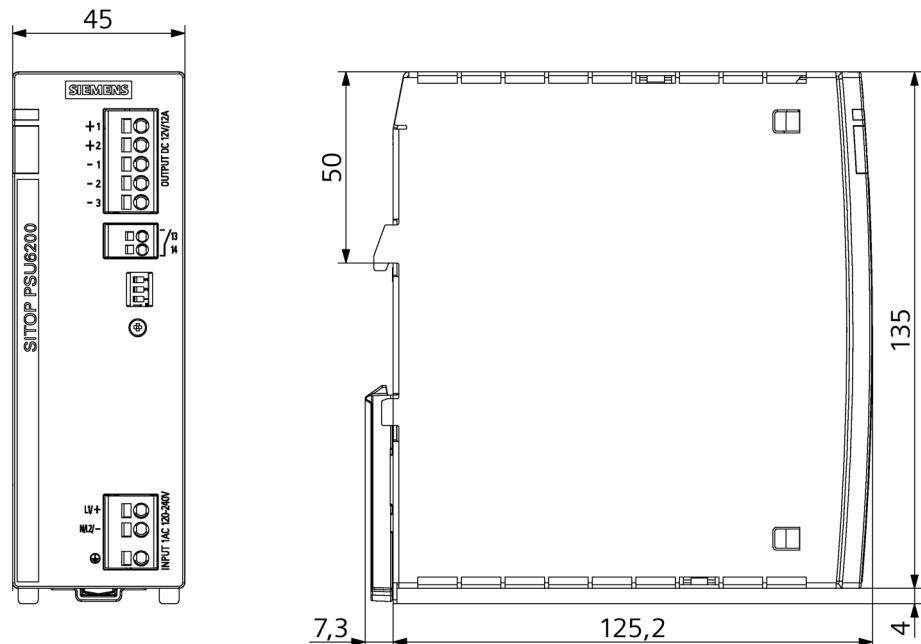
Dimension drawing 6EP3324-7SB00-3AX0, 6EP3334-7SB00-3AX0, 6EP3344-7SB00-3AX0 and 6EP3334-7SC00-3AX0
